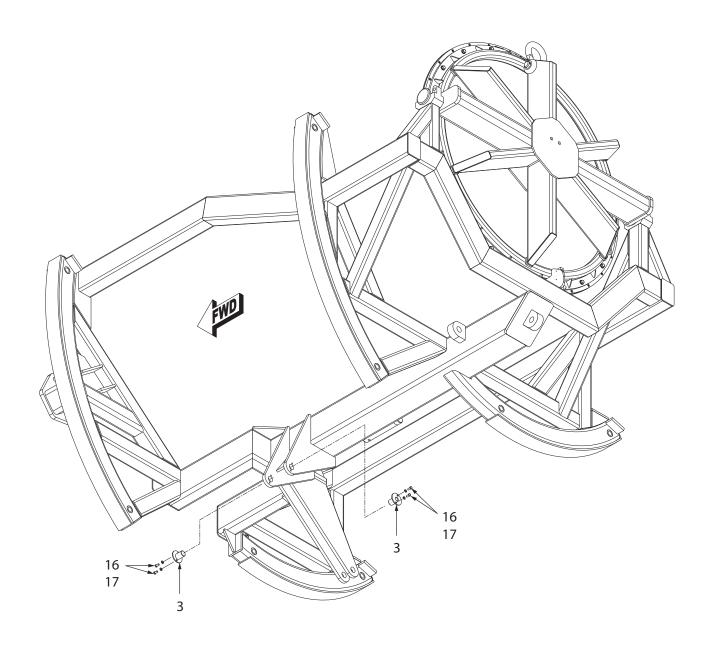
AGSE-E18406-S01 Cradle Assembly
